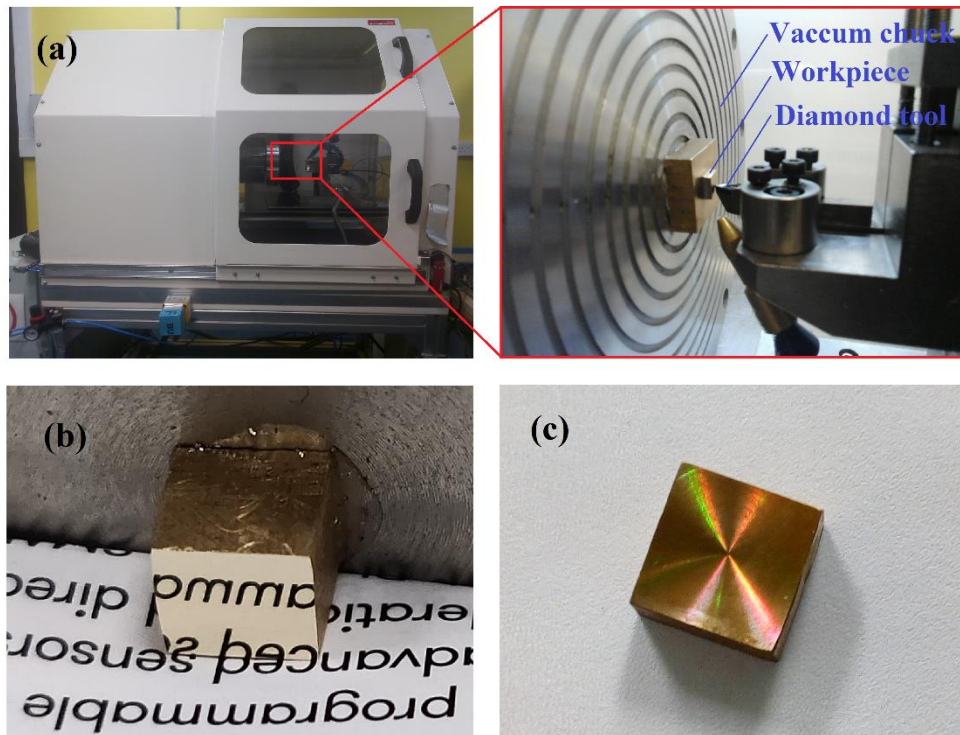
Fabrication of brass stamp with SPDT. (a) Machining set up. (b) Brass stamp after flat turning. (c) Brass stamp after microstructure fabrication.
